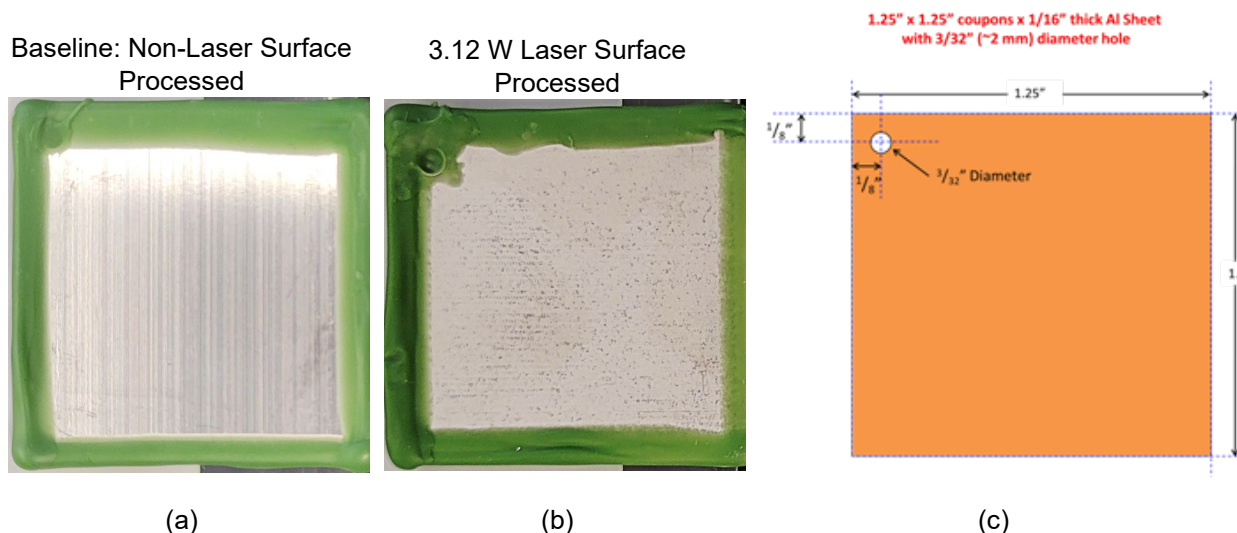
(a) and (b) show a comparison of the surfaces of AA6061 coupons without and with laser surface processing. (c) Schematic showing dimensions of the sample and the hole (diameter- 3/32") drilled.
